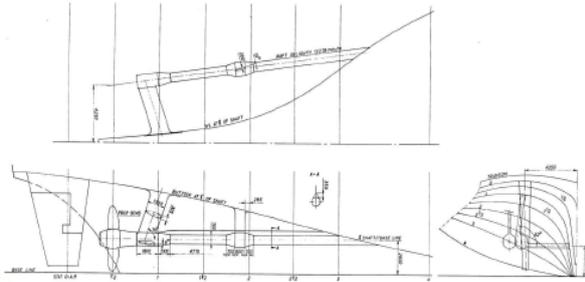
Example E with 7 deg. converging shaft angle and splitter plates.
